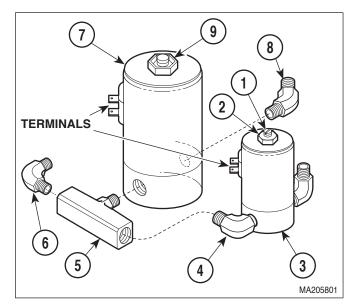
Fill Solenoid Fittings Removal / Installation
